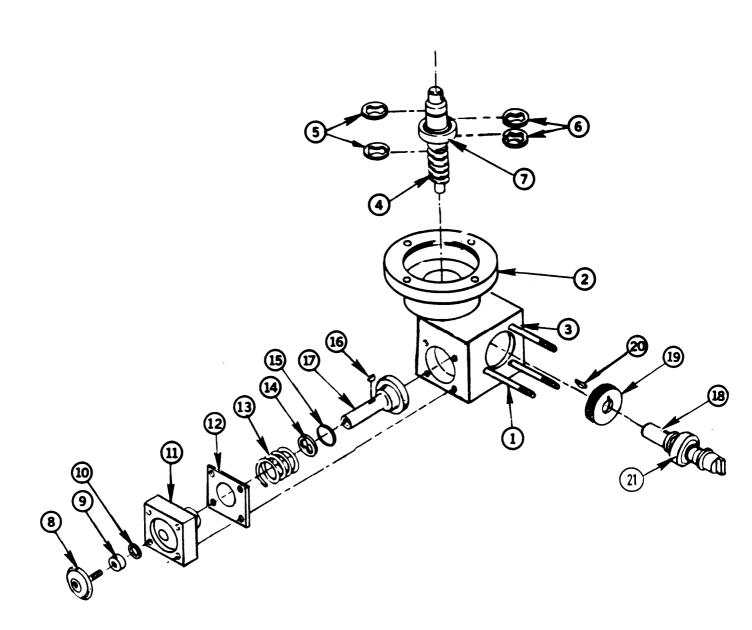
Chemical Feed Pump Block Assembly (USMC)
